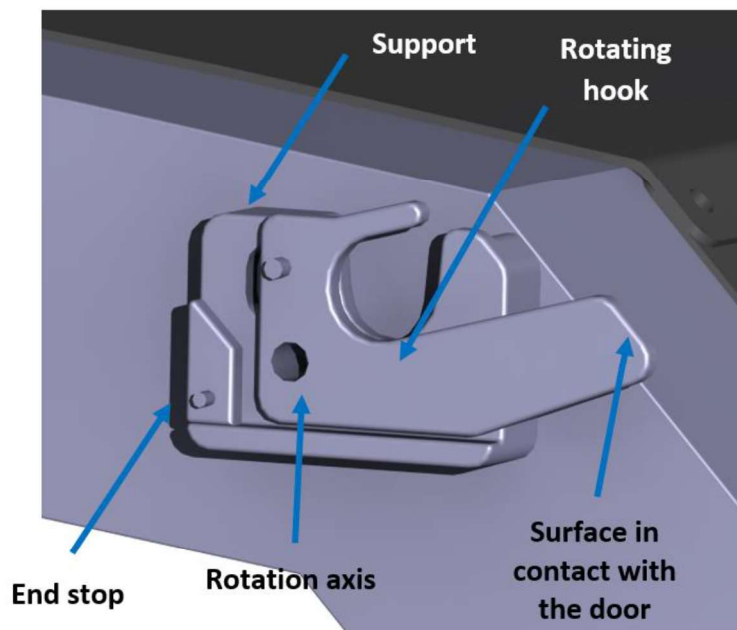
SUPPORT WITH A ROTATING HOOK FIXED TO THE UPPER BODY [24]
